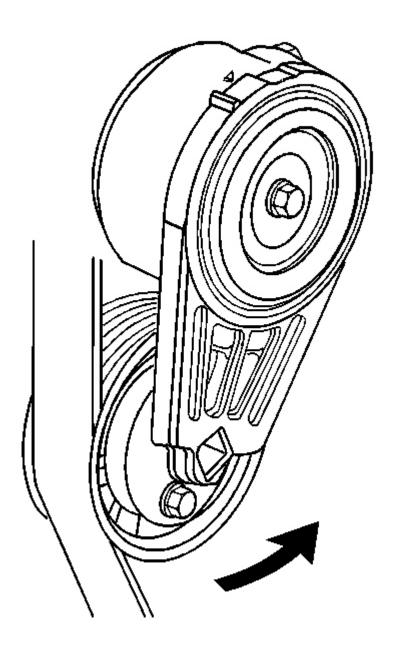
Releasing Drive Belt Tension Courtesy of GENERAL MOTORS CORP.
